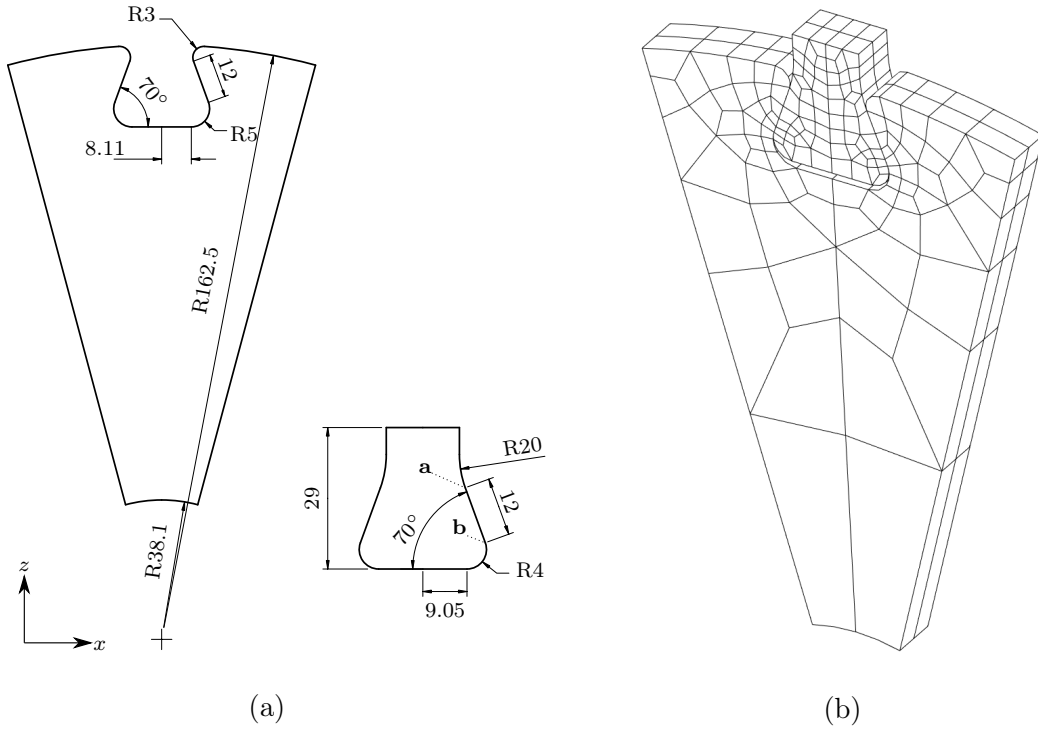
(a) Rotor and Blade geometry and interest points at contact patch (dimensions in mm), and (b) Quadratic element mesh for the problem.
